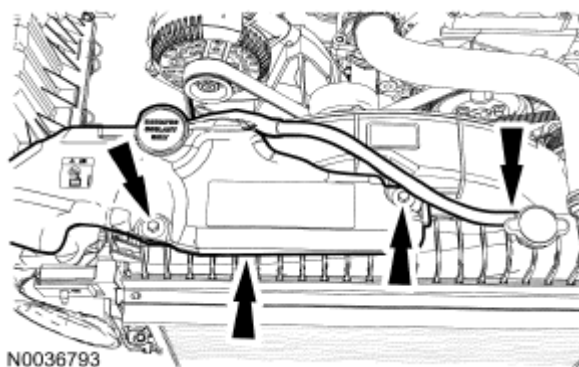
Locating Coolant Overflow Hose, Bolts And Coolant Expansion Tank
